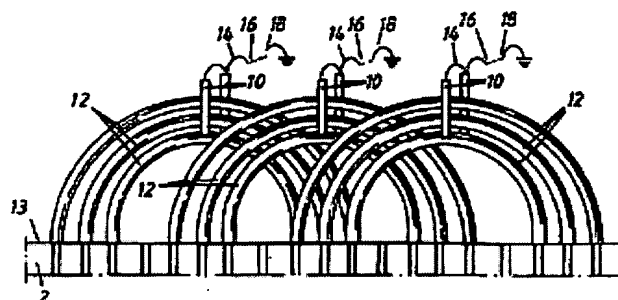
Detail of End-Winding Region of Machine Having ABB's Flexible Cable Windings
